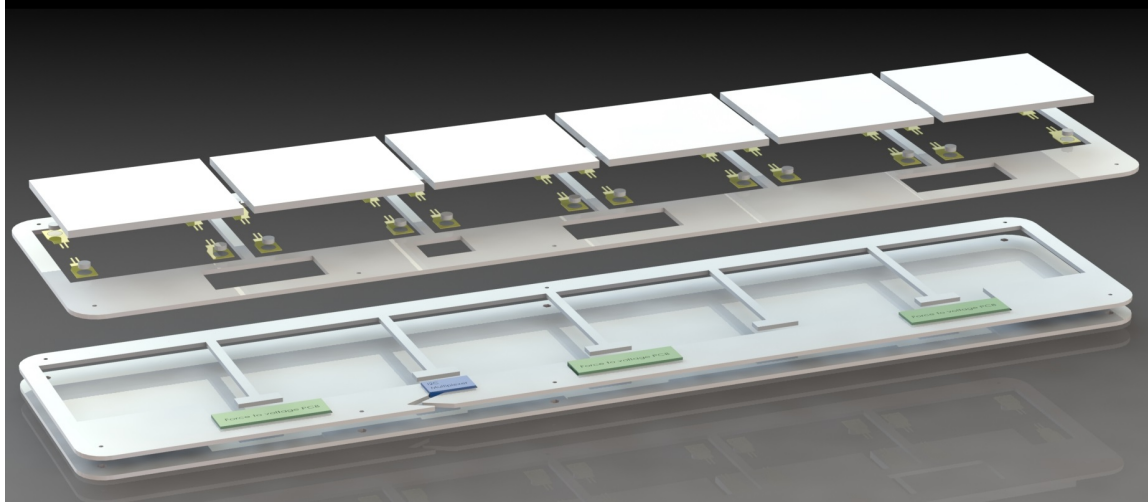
Exploded view illustrating the different plate layers of the sensor system.
